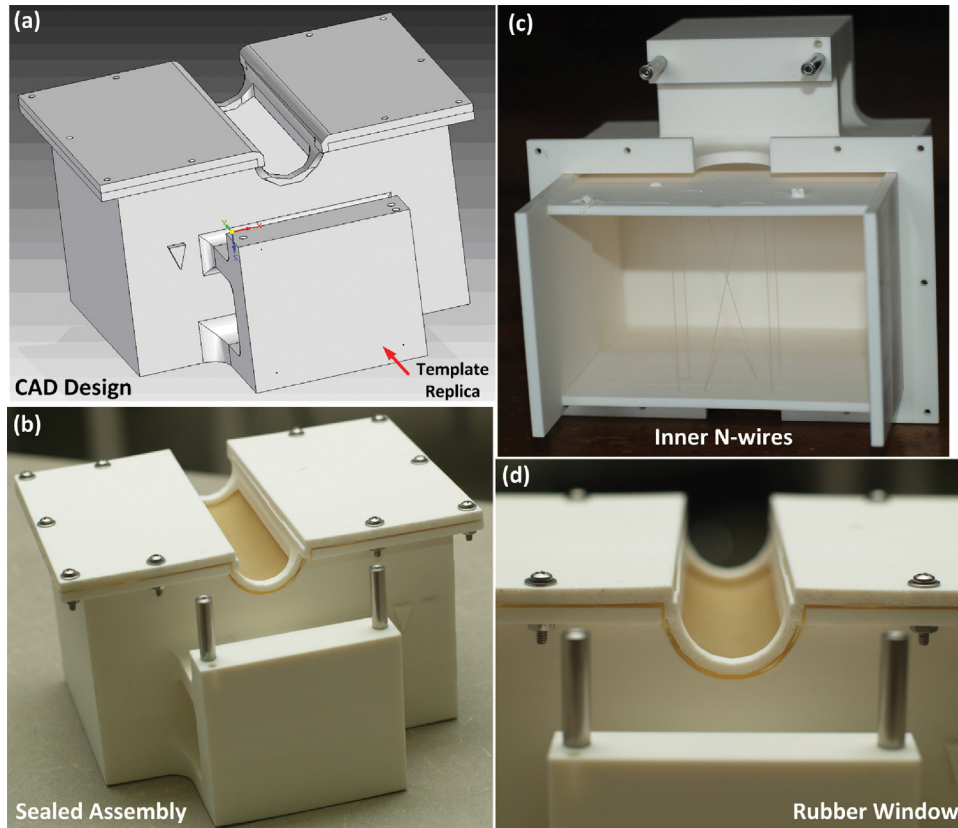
iCAL phantom: CAD design, inner N-wires, complete assembly, and rubber seal.
